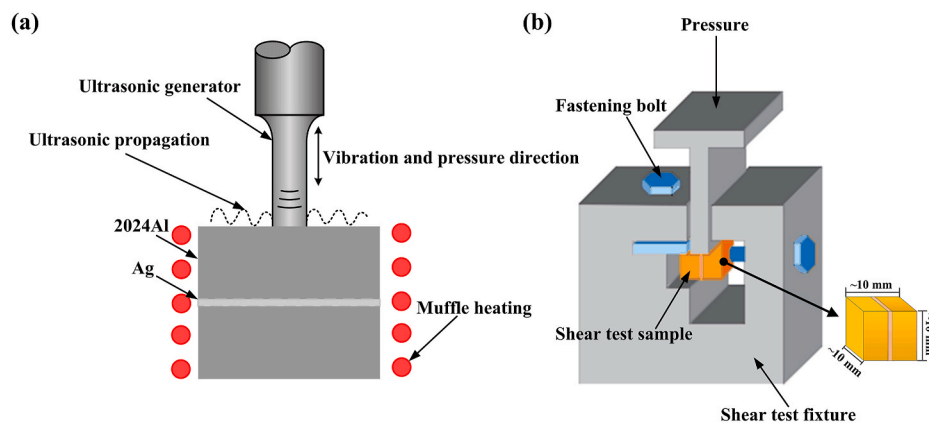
(a) Welding process diagram; (b) Shear test schematic.
